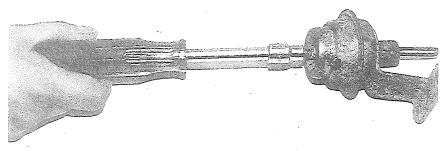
If the adjuster screw on a Motorcraft choke pull-off doesn't budge, don't force it. Heat the screw with the tip of your soldering iron in order to soften the factory-applied thread-locking sealer.
